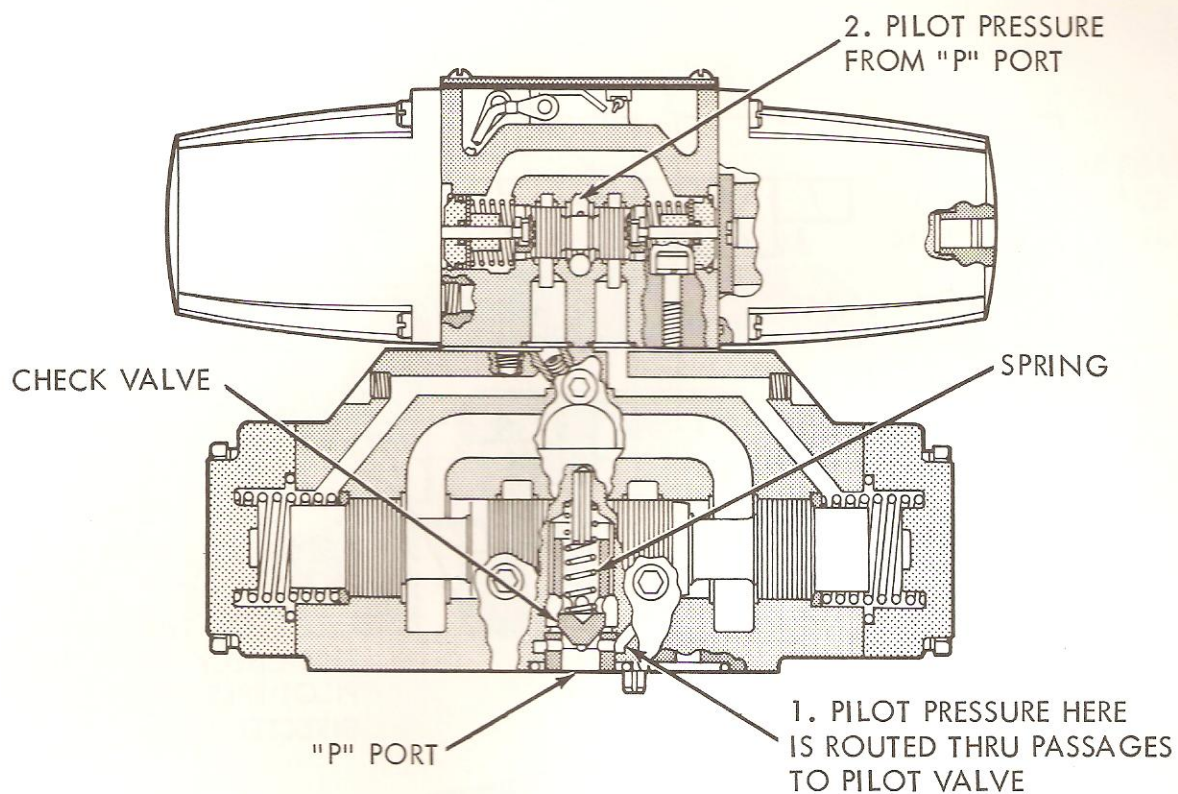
Integral Pilot Pressure Check Valve
